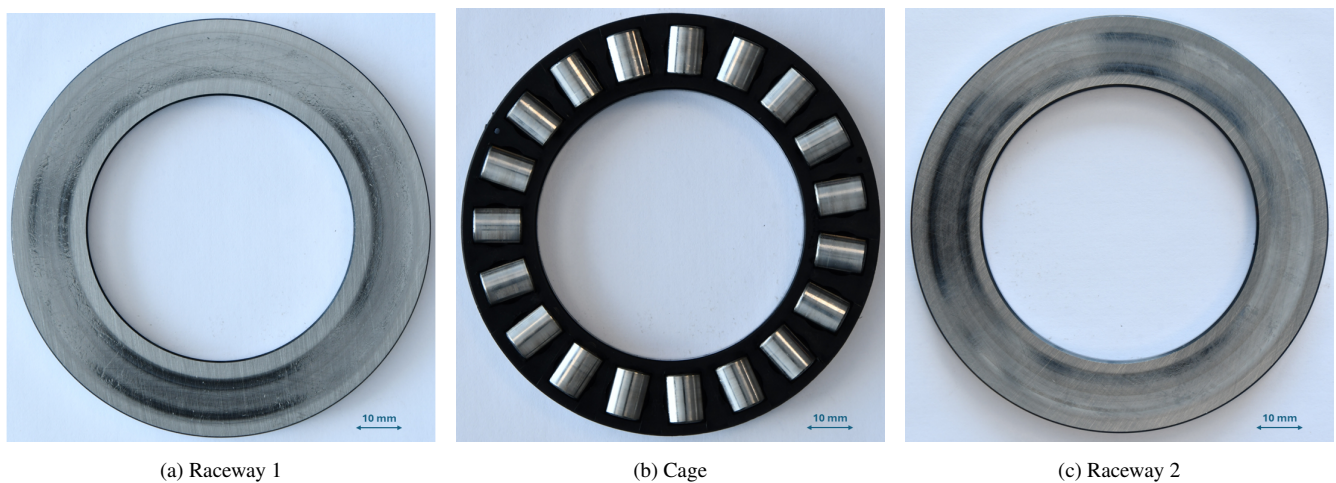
Pictures of bearing components for Bearing 2 of T02. Refer to Table 5 for designation of tests. The outer diameter of the bearing is 95 mm and the diameter and length of the rollers are both 11 mm.
